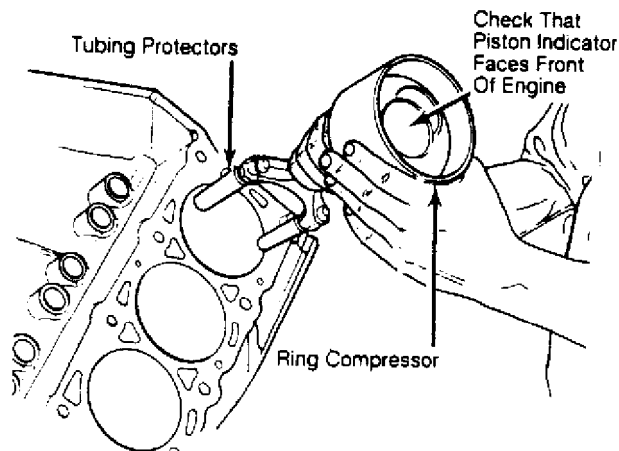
Installing Piston & Connecting Rod Assembly - Typical
